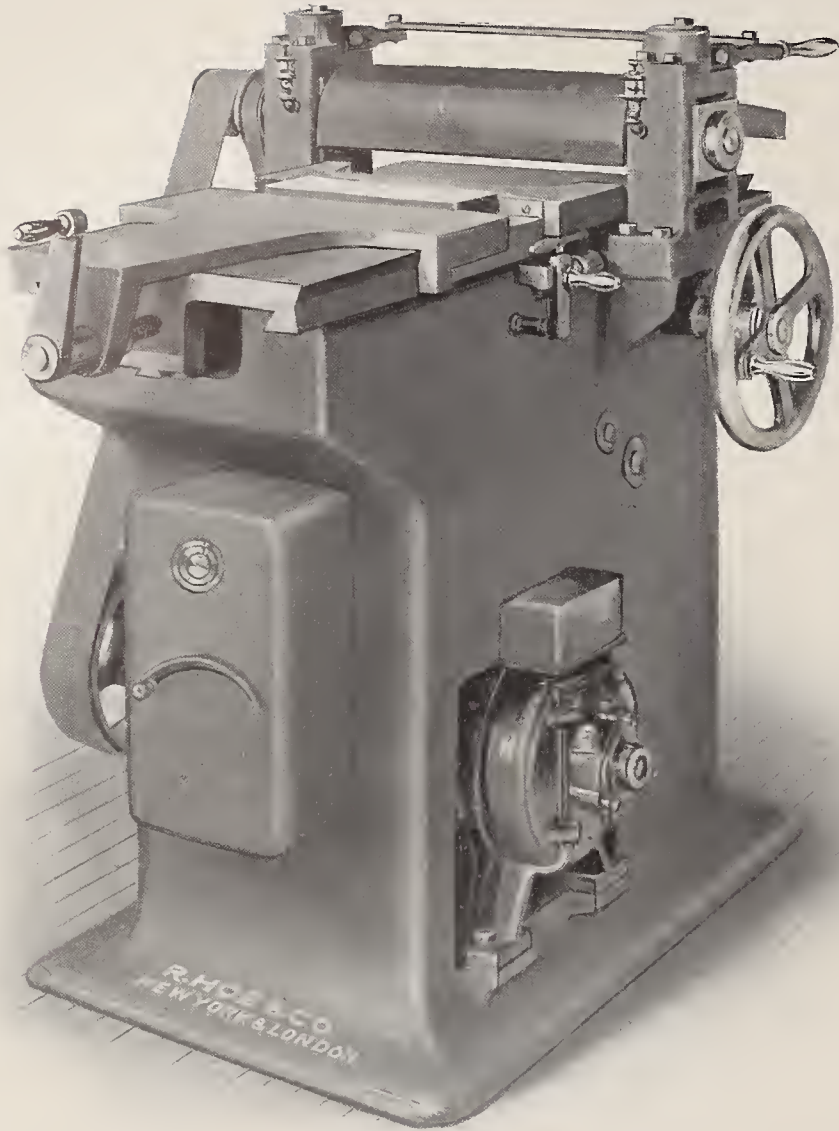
AN ELECTROTYPE PLANING MACHINE DRIVEN BY A SPRAGUE MOTOR
